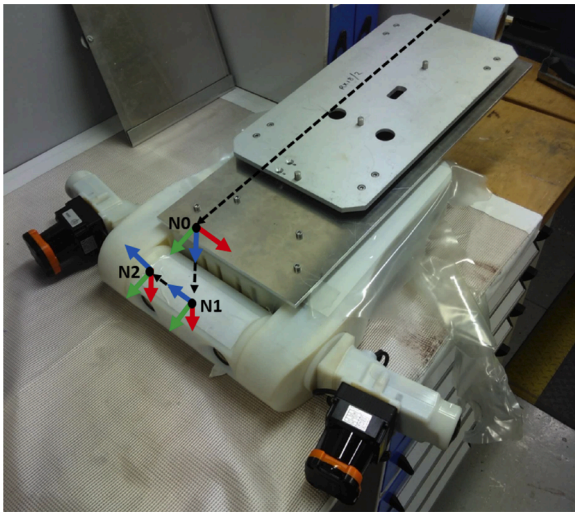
NABU assembly. The light gray plate on the top comes from a Tile Carrier and attaches to the Manual Tine shown in Fig. 2, whilst the dark gray plate was manufactured specifically as a mounting adapter. Note that the assembly is pictured upside-down in this figure. DH-frames N0-N2 are detailed in this figure. Z = Green, X = Blue and Y = Red. (For interpretation of the references to colour in this figure legend, the reader is referred to the web version of this article.)
